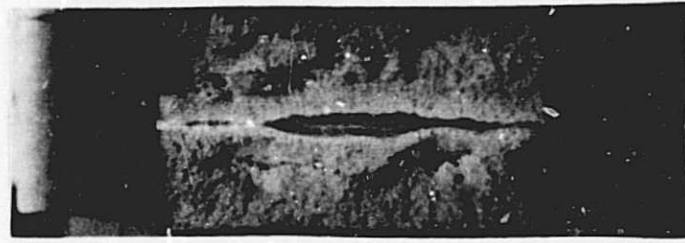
Delta scan recording and fracture surface of weld 2014-1.0-3D at IX.
